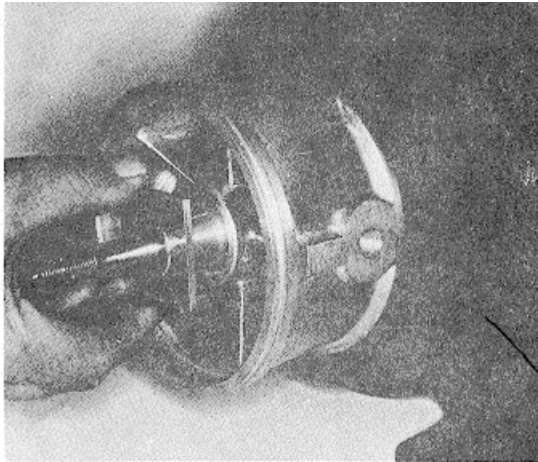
, T429. Removing teflon bearing insert and floating bearing from rotor shaft.
